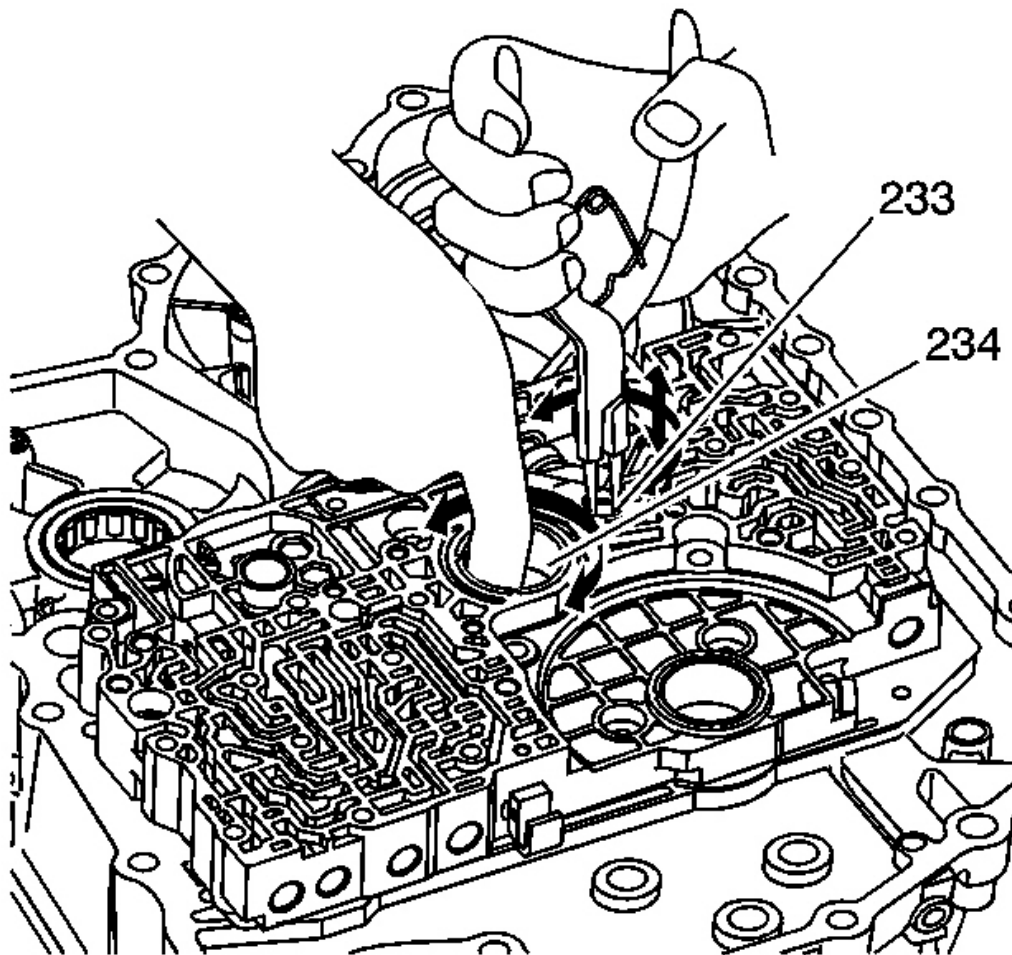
Inspecting The Automatic Transmission Fluid Pump Drive Gear Pin & Automatic Transmission Fluid Pump Driven Gear Pin For Smooth Rotation
